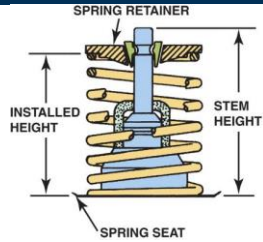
Installed height is determined by measuring the distance from the spring seat to the bottom of the valve spring retainer.
